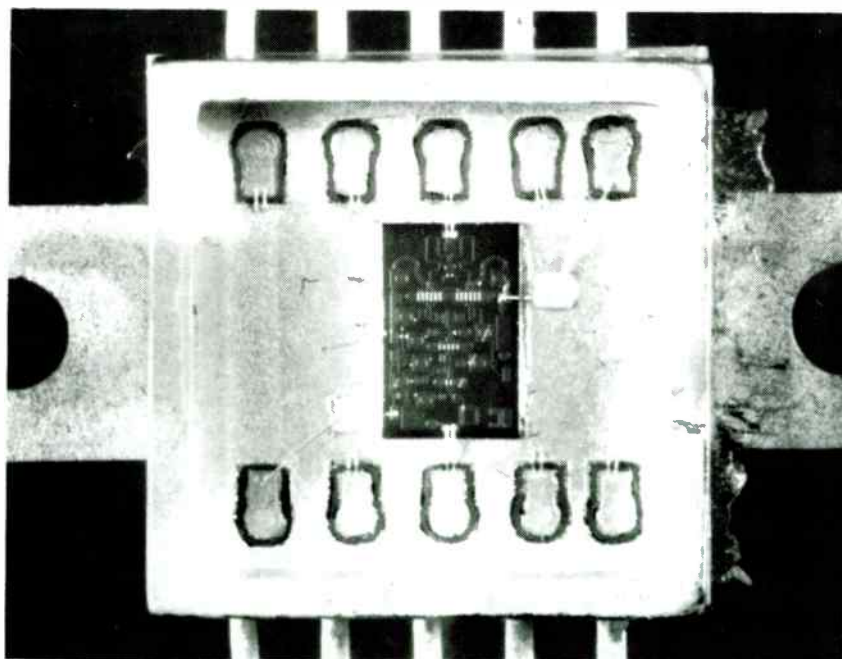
Photo of 5.8 GHz MMIC Assembly in Package
